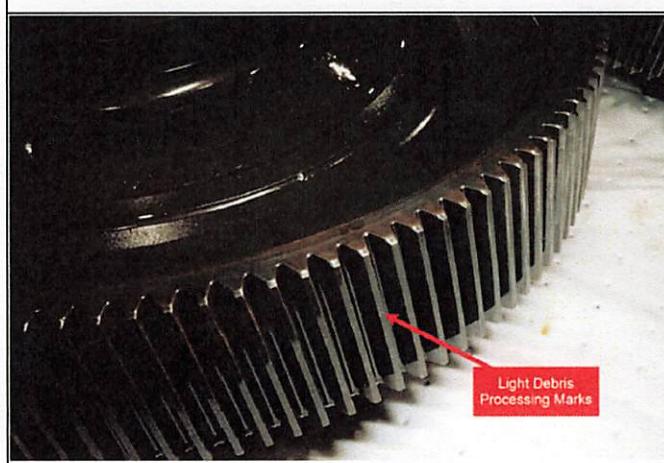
Photo of -109 Input Idler Helical Gear Damage (Tab J-47)
